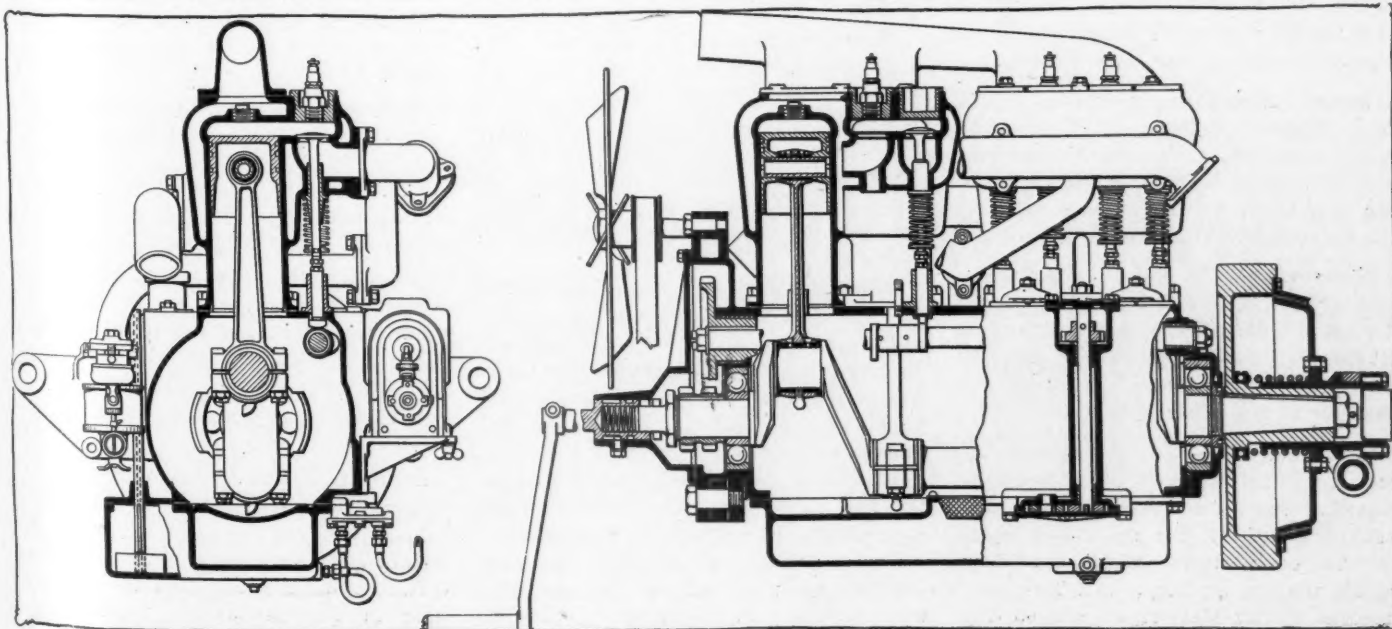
SECTIONAL VIEWS OF NEW CONTINENTAL MOTOR
